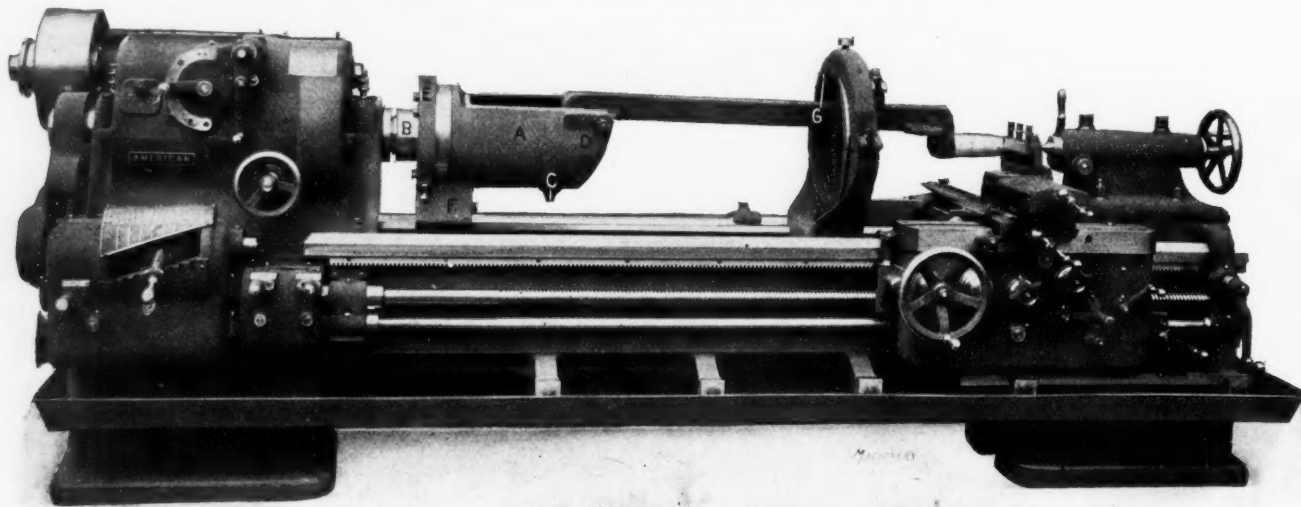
American High-duty Lathe equipped with Special Fixture for turning Axles after being formed to Shape
